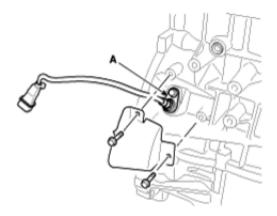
Identifying CKP Sensor Courtesy of HYUNDAI MOTOR CO.
